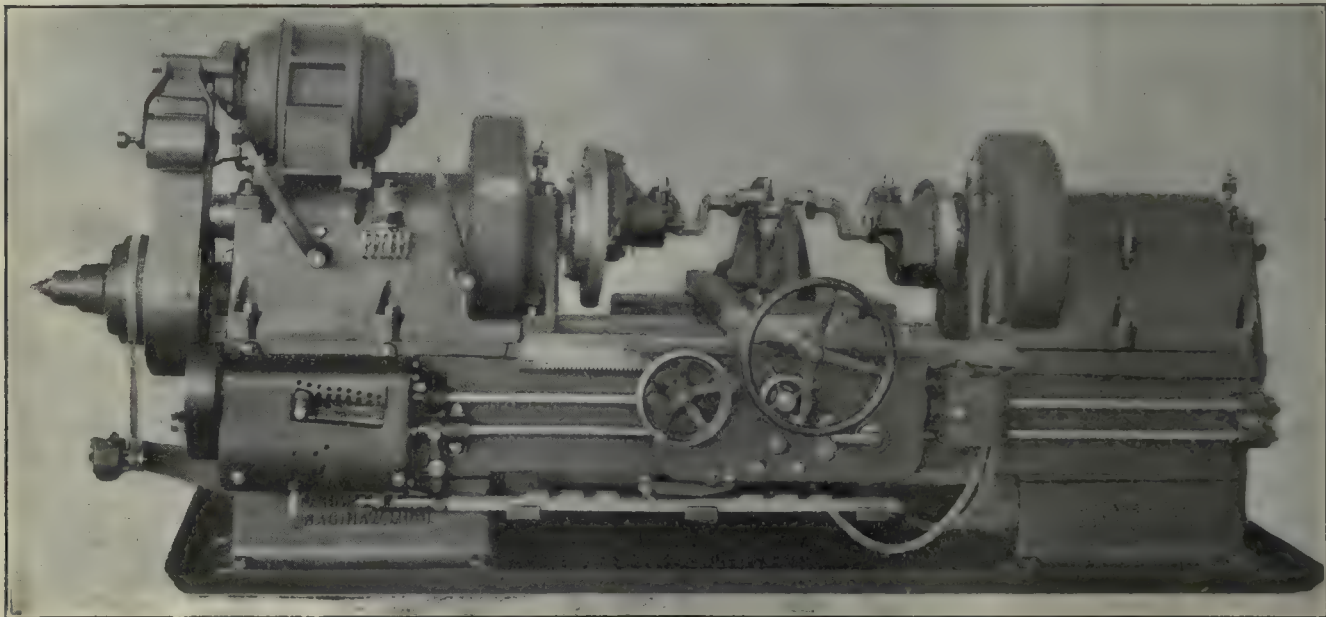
WICKES UNIVERSAL CRANKSHAFT LATHE
